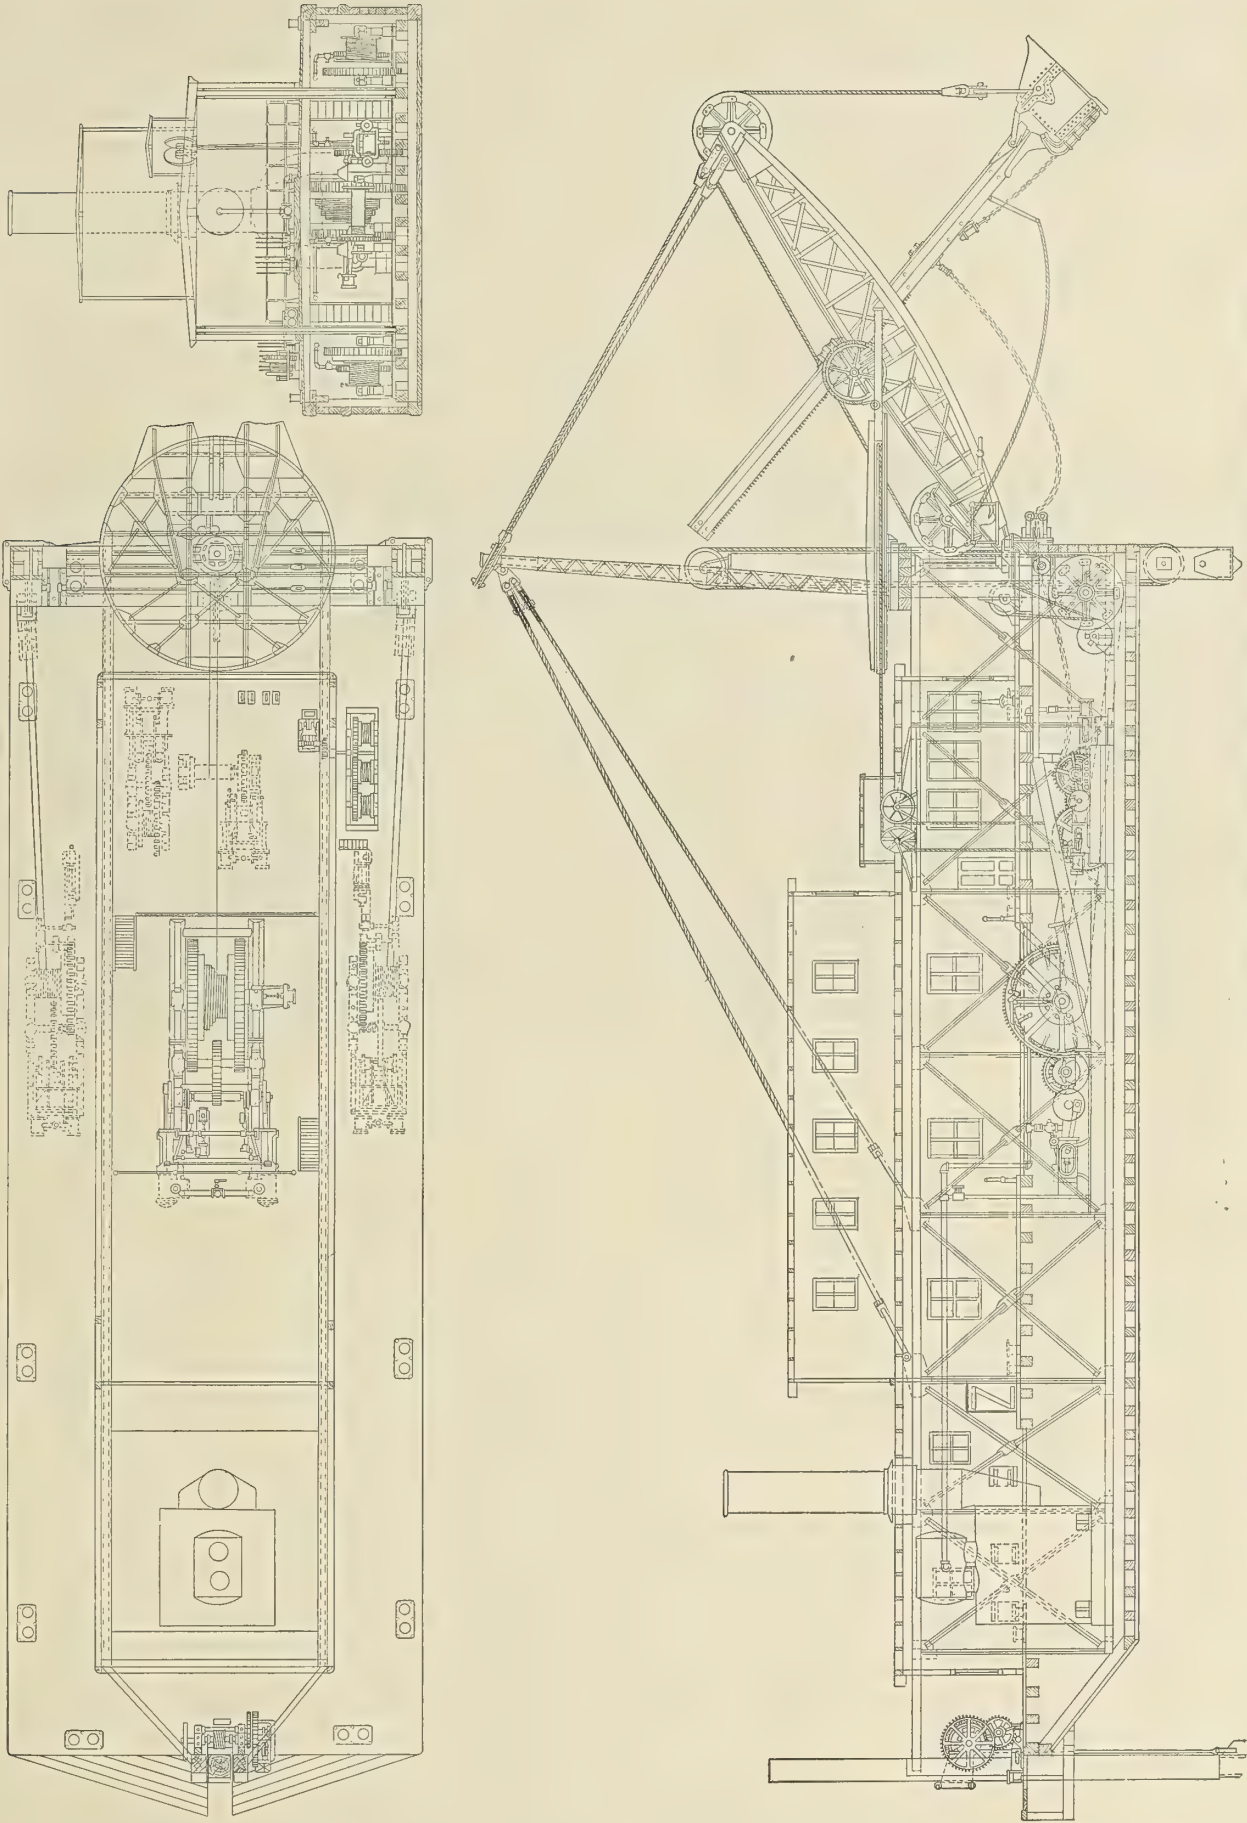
INBOARD PROFILE, DECK PLAN AND CROSS SECTION OF THE TOLEDO, SHOWING CONSTRUCTION OF HULL AND LOCATION OF DREDGING MACHINERY.
